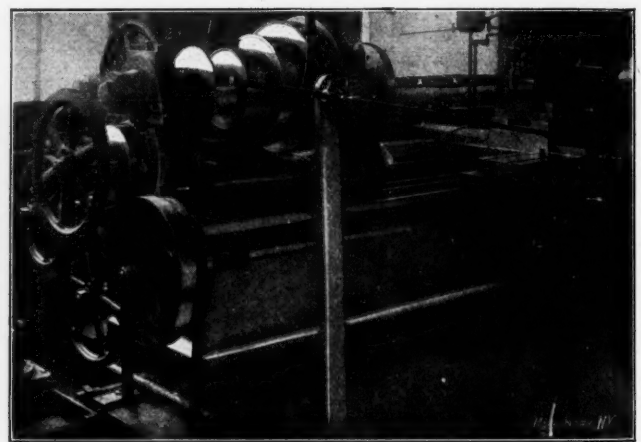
Lathe driven by Pulley on Lead-screw when Cutting Spiral Grooves
